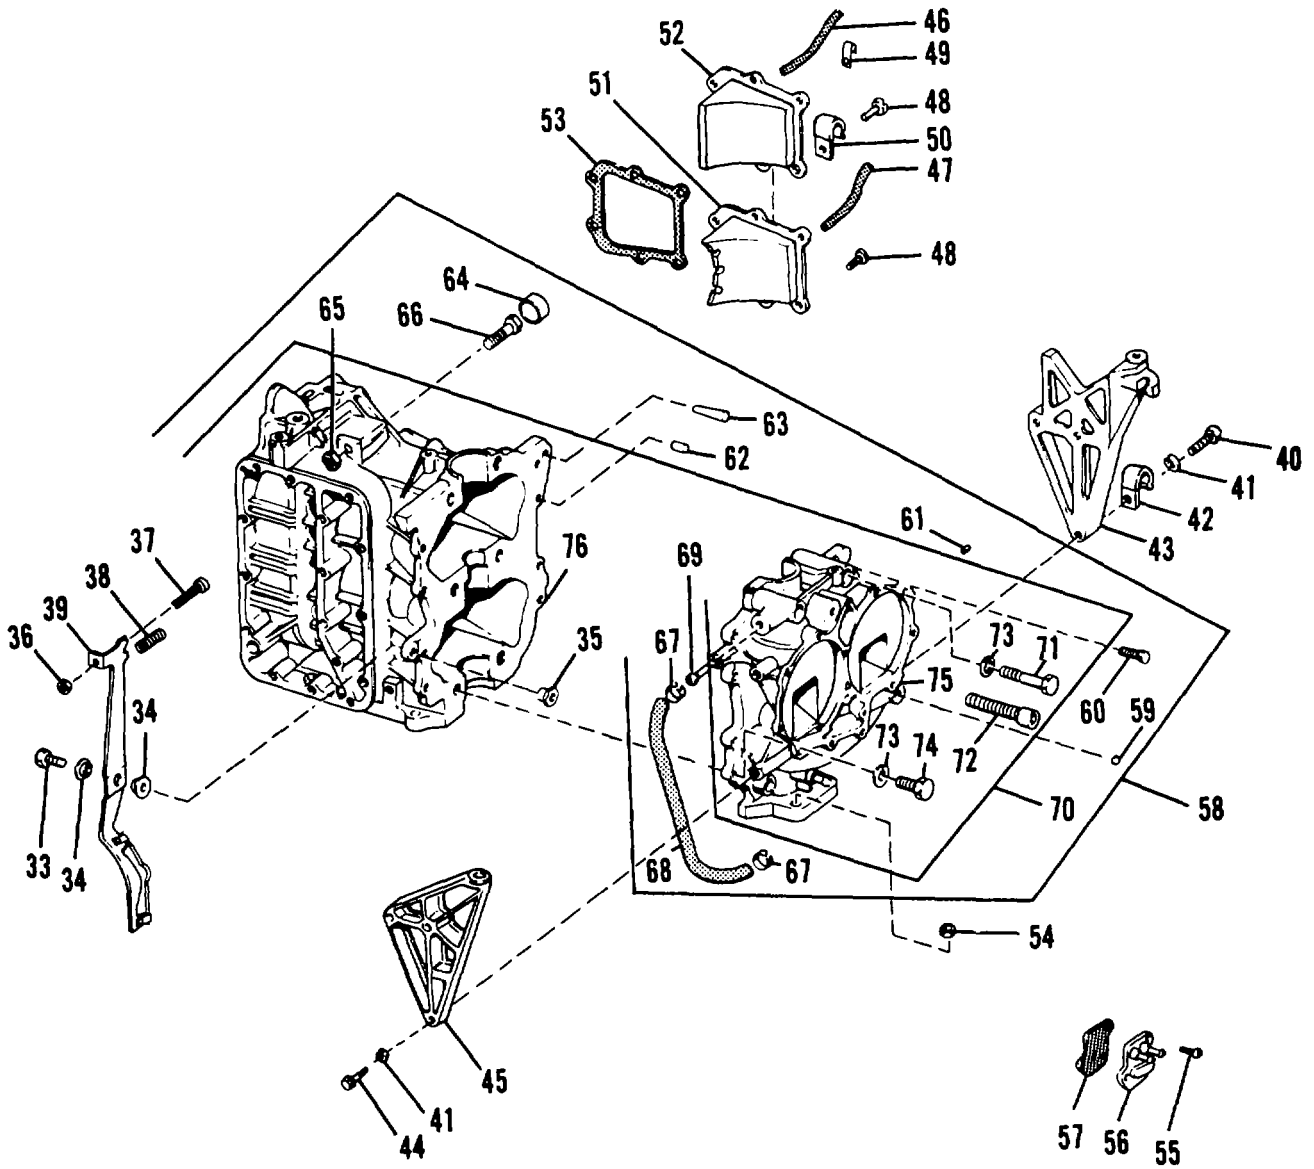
Cylinder and Crankcase (Sheet 2 of 2)
